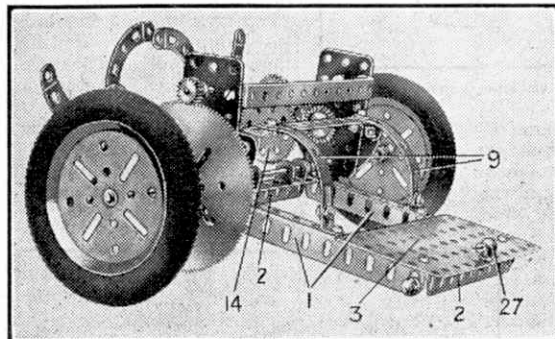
The hay turner seen from the front, ready for coupling to the tractor.
